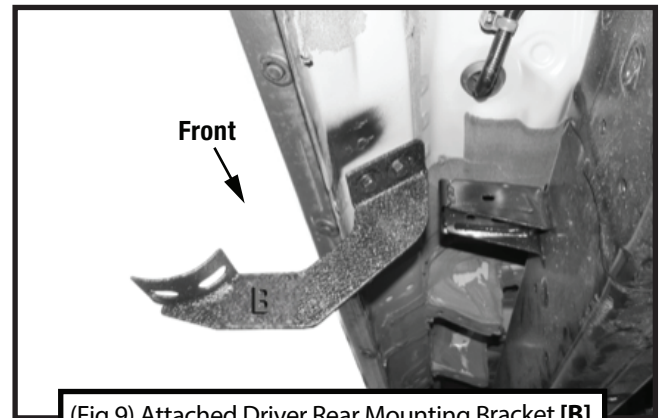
Locate Driver Side Rear mounting location and attach Bracket [B].
